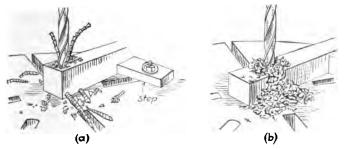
Shows appearance (a) of steel chips and (b) of cast iron chips when properly sharpened drill is used.
